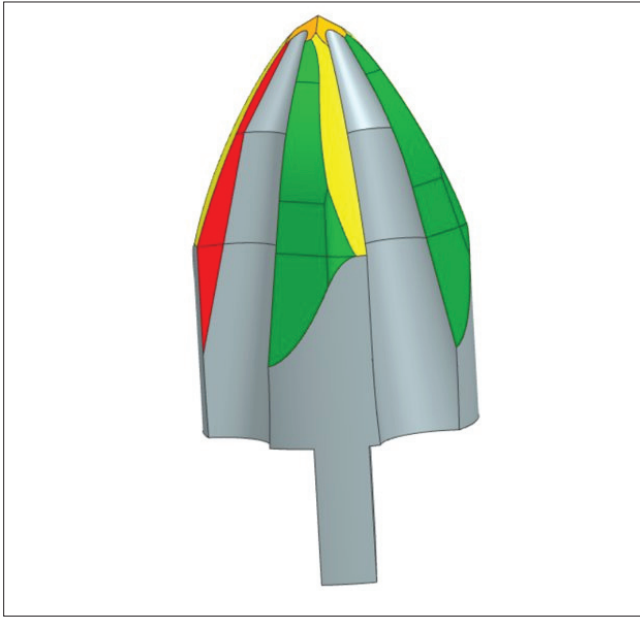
3D-model of DEC drill tip sintered using PPC technology
